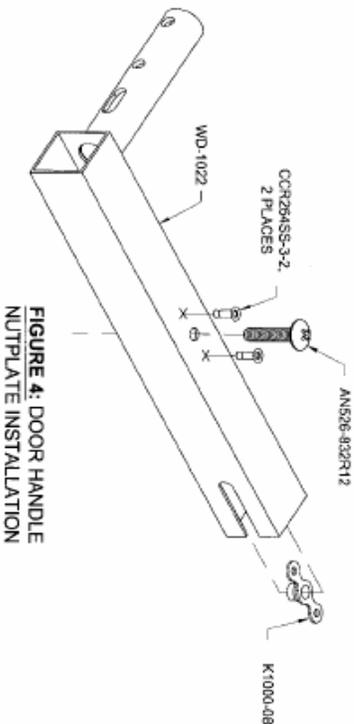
DOOR HANDLE NUTPLATE INSTALLATION
